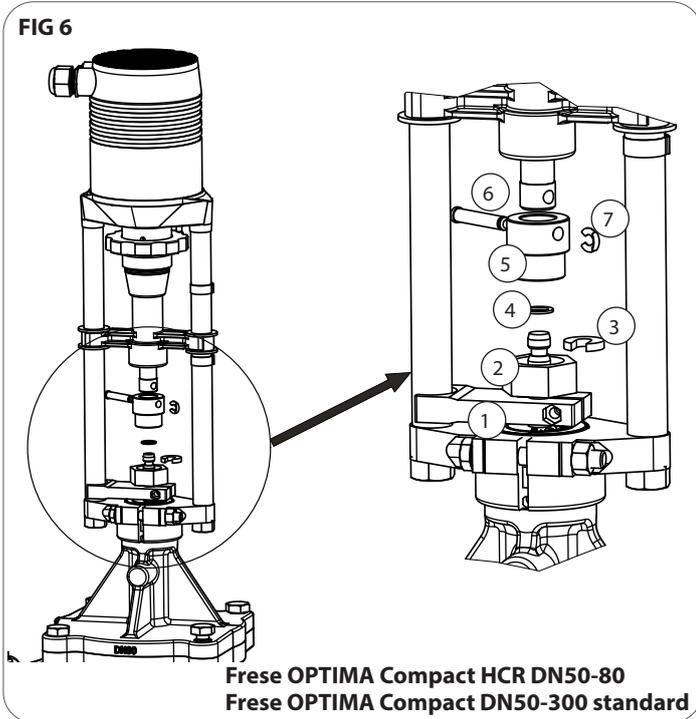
Spindle connection OPTIMA Compact HCR DN50-DN80 and OPTIMA Compact DN50-DN300 flanged versions.
